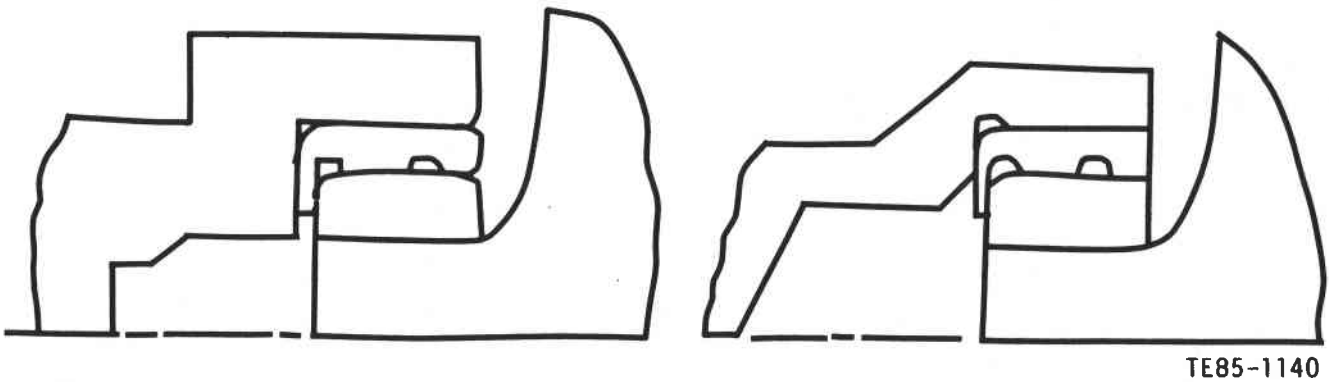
Shrink fit assembly stresses for original and modified gasifier rotor/shaft attachment.
